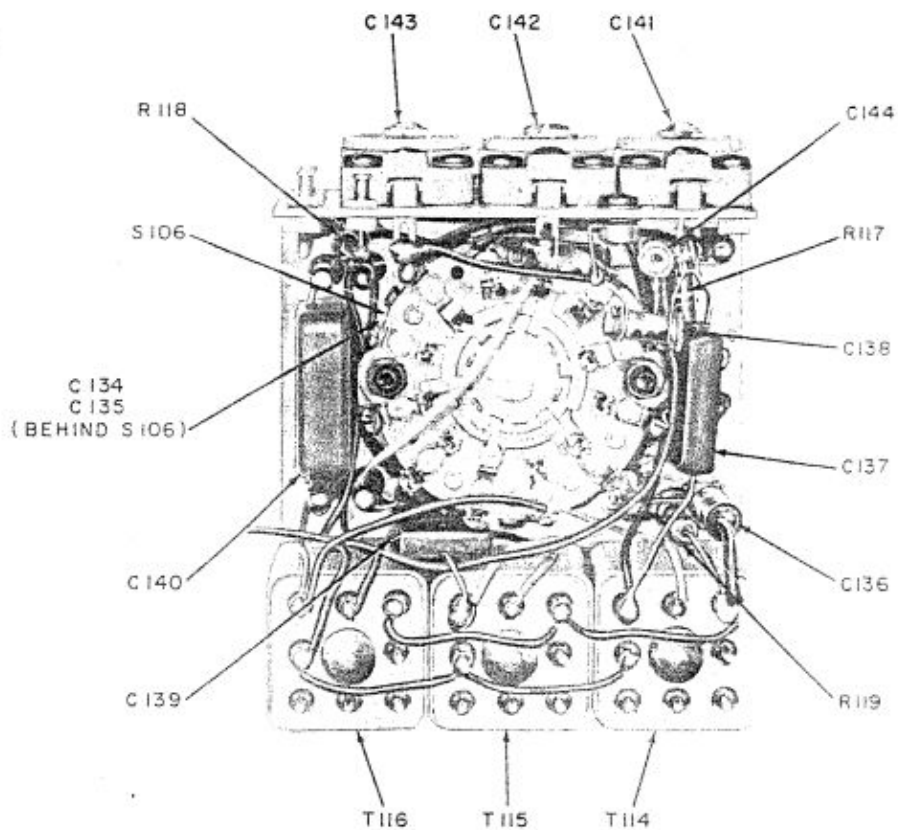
ARC Type R-30A Receiver, Oscillator Assembly Z106
